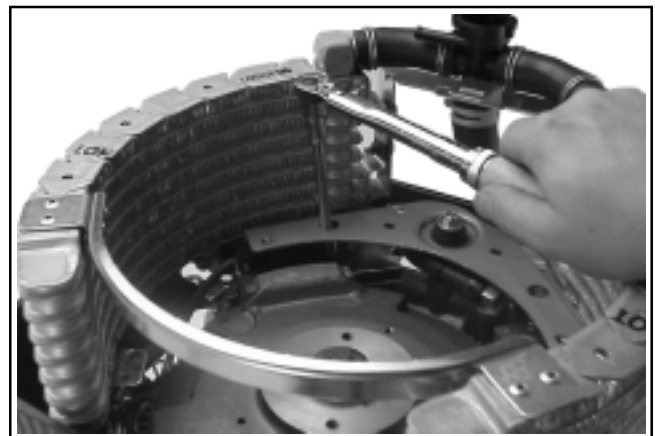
Torquing of the Flywheel Mounting Screw and Washer.
